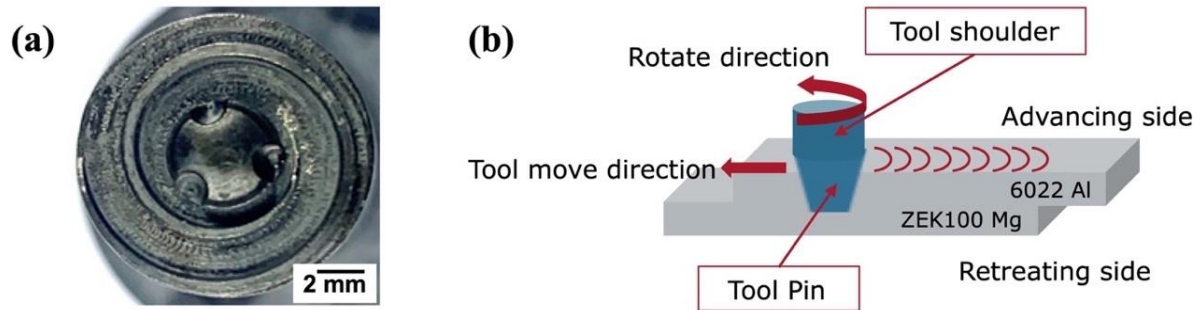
(a) Image of the tri-flute pin with scrolled shoulder; (b) Schematic of friction stir lap welding (FSLW) Al-Mg joint.
